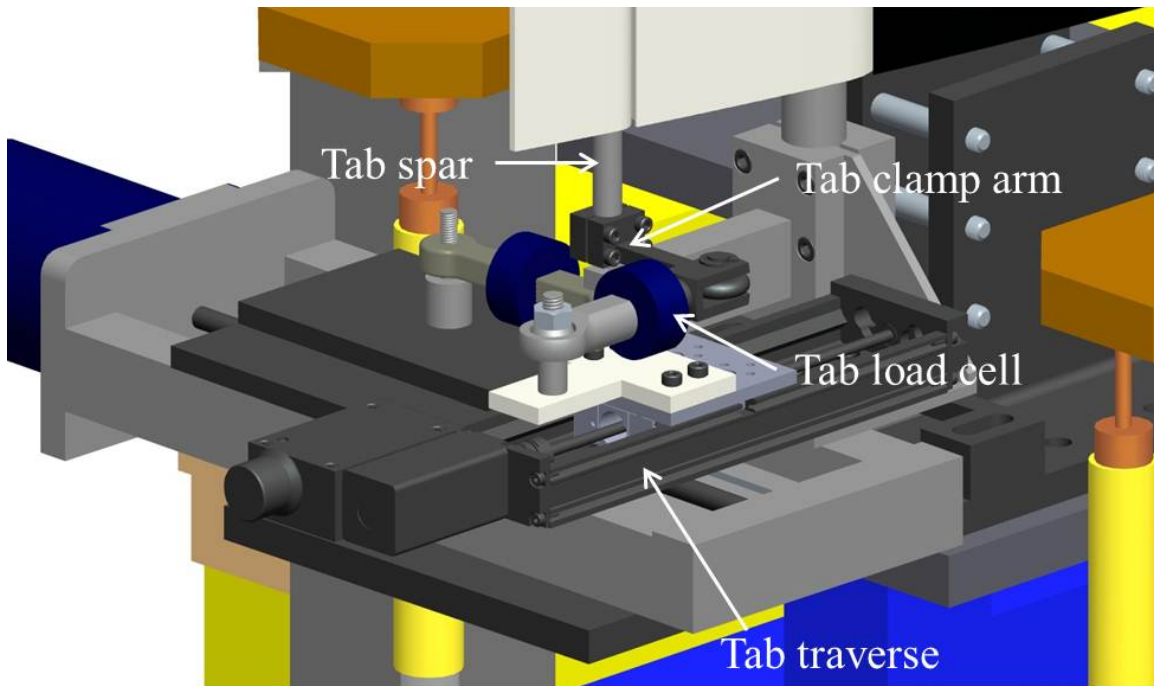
Three-dimensional model view of tab hinge balance assembly.
